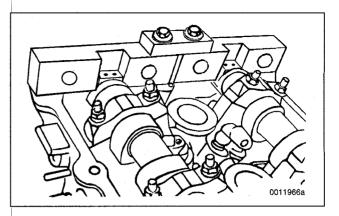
BMW special tool no. 11 3 240 installed on rear of carnshafts to position carnshafts at TDC. (M44 carnshafts shown. Other engines are similar.
